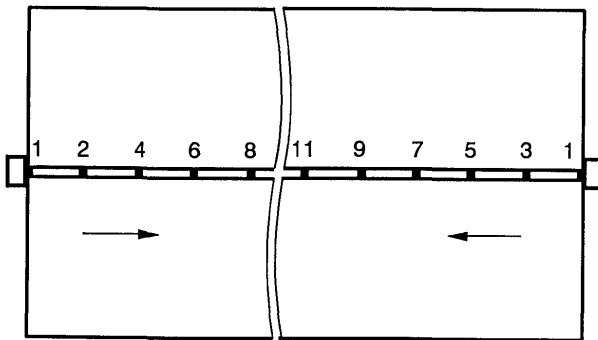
Sequential tack welding to correct middle-gap.
